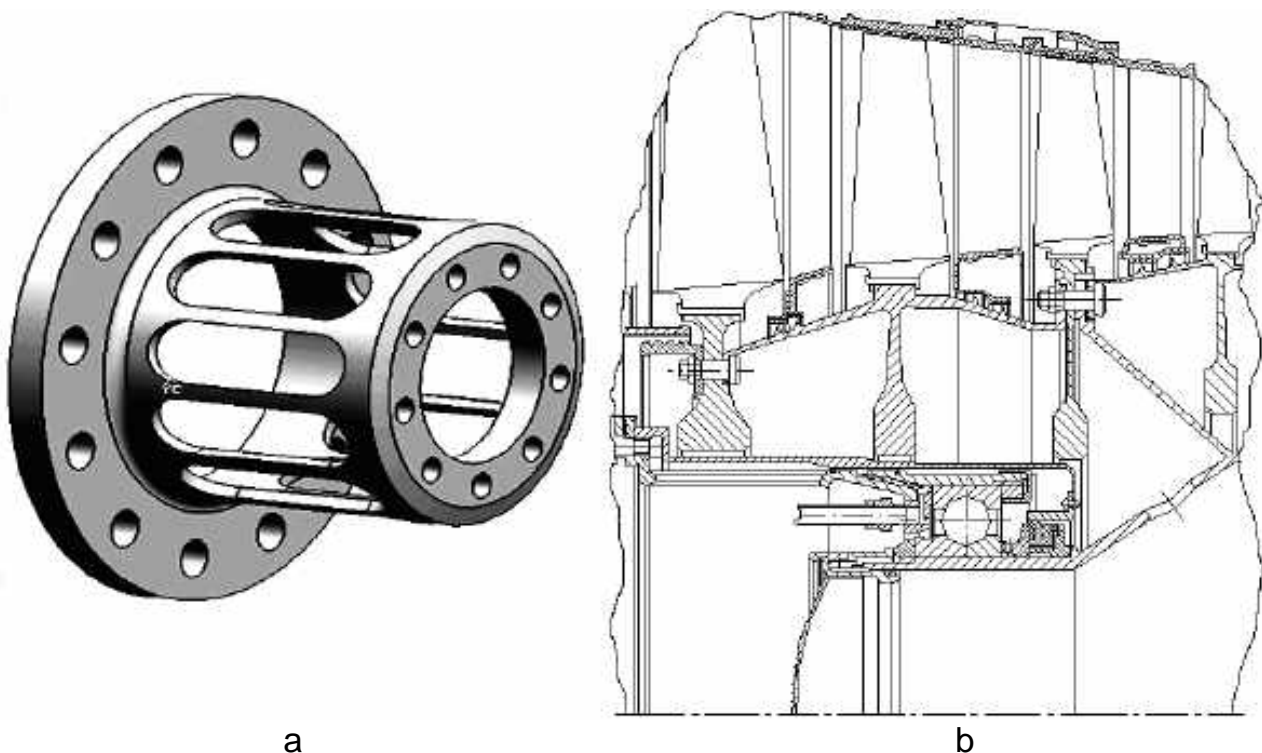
Elastic-damper support of a “squirrel wheel” type:
